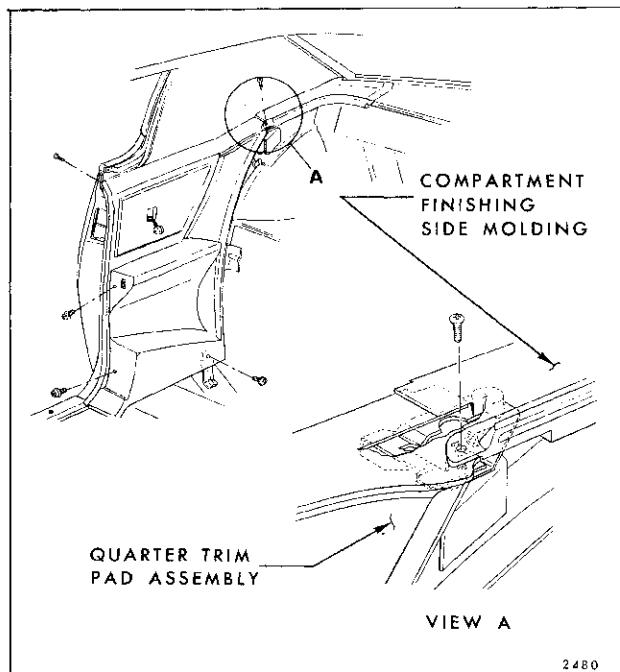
Rear Quarter Trim Assembly - Cadillac “E” Styles
